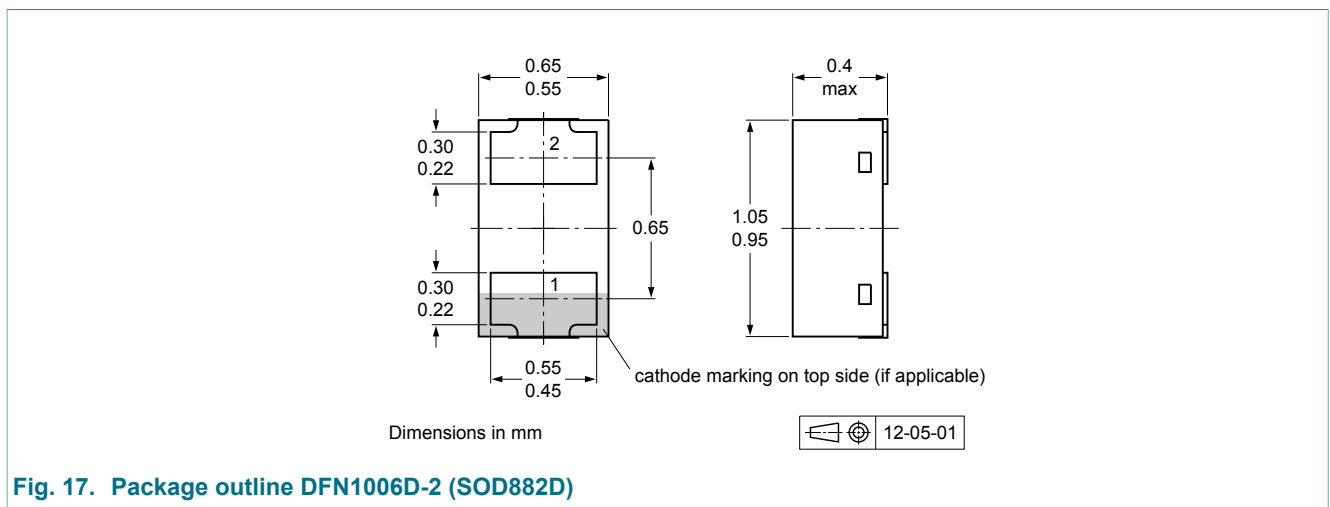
Package outline DFN1006D-2 (SOD882D)
